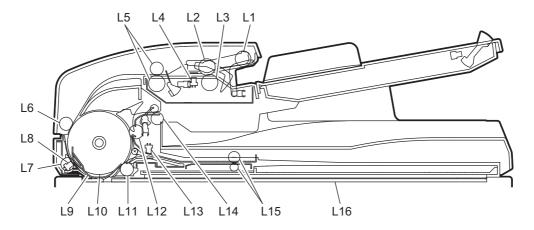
Reversing Automatic Document Feeder (RADF: MR-3016)
